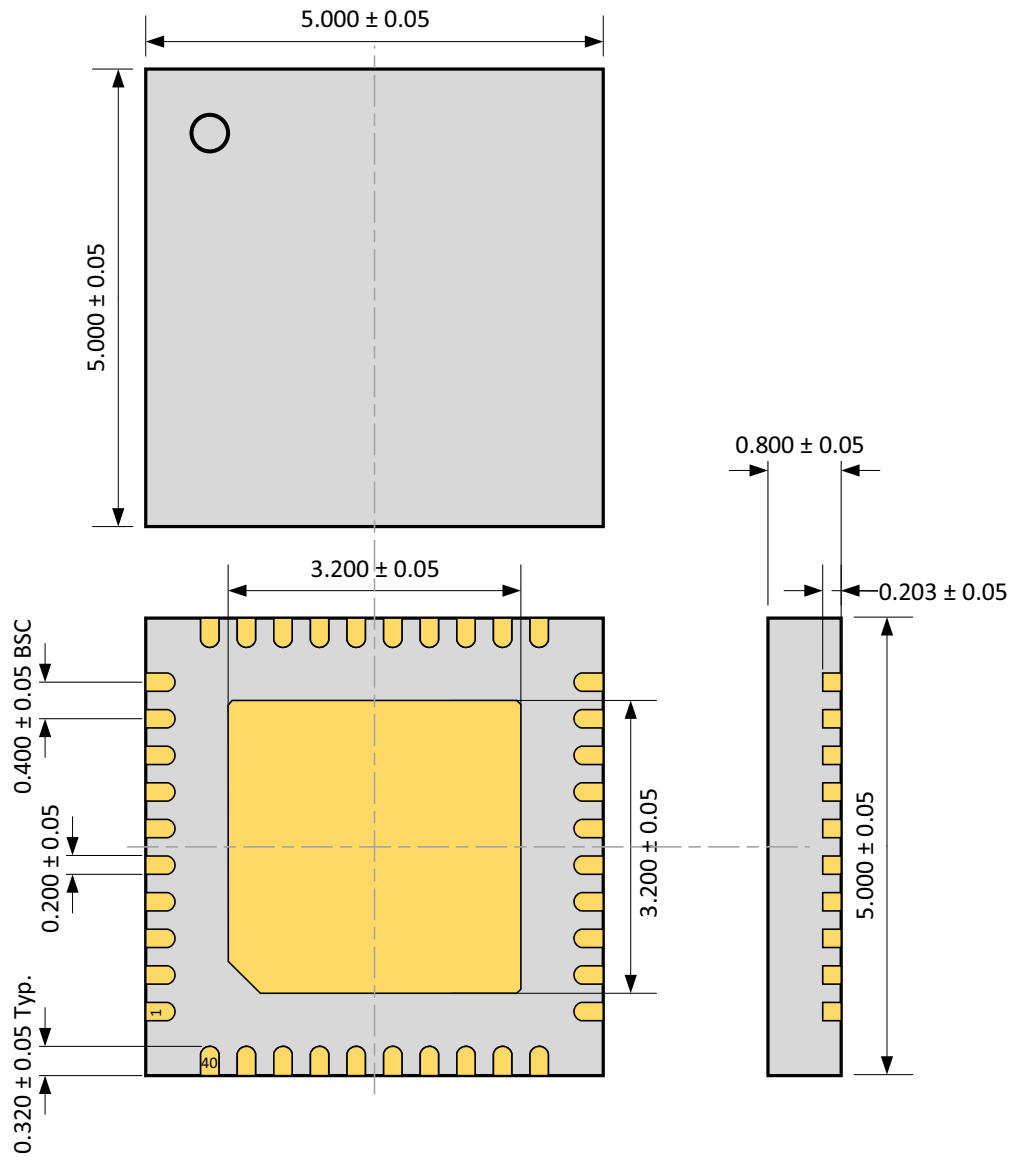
QFN 40-pin 5x5mm drawing (all dimensions in mm)
